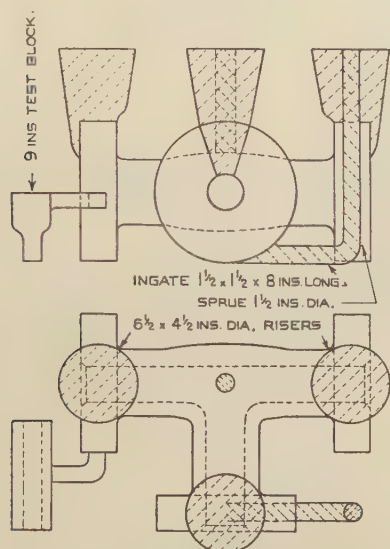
Casting and Feeding Arrangements for 3-in. Equal Tee.
